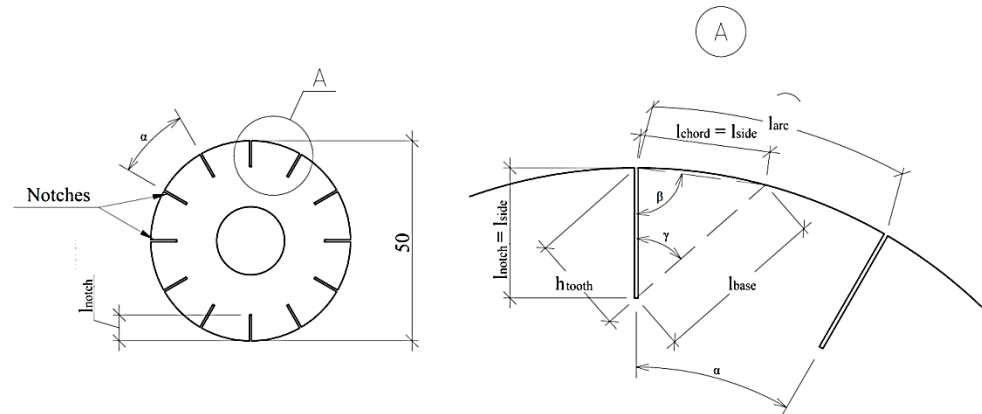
Scheme of a workpiece for stamping out the Bulldog claw washer with a diameter of 50 mm and the values that determine the tooth dimensions
